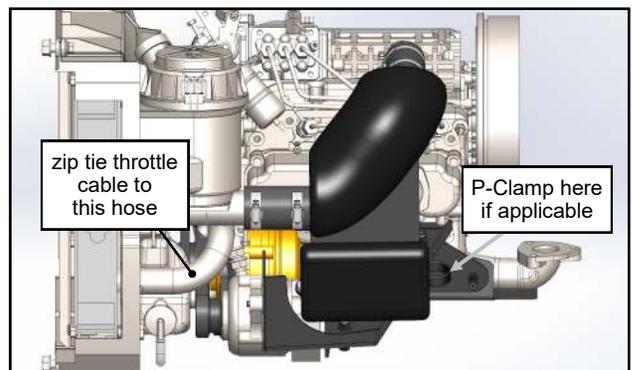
(Secure Throttle Cable & Heater Line)
